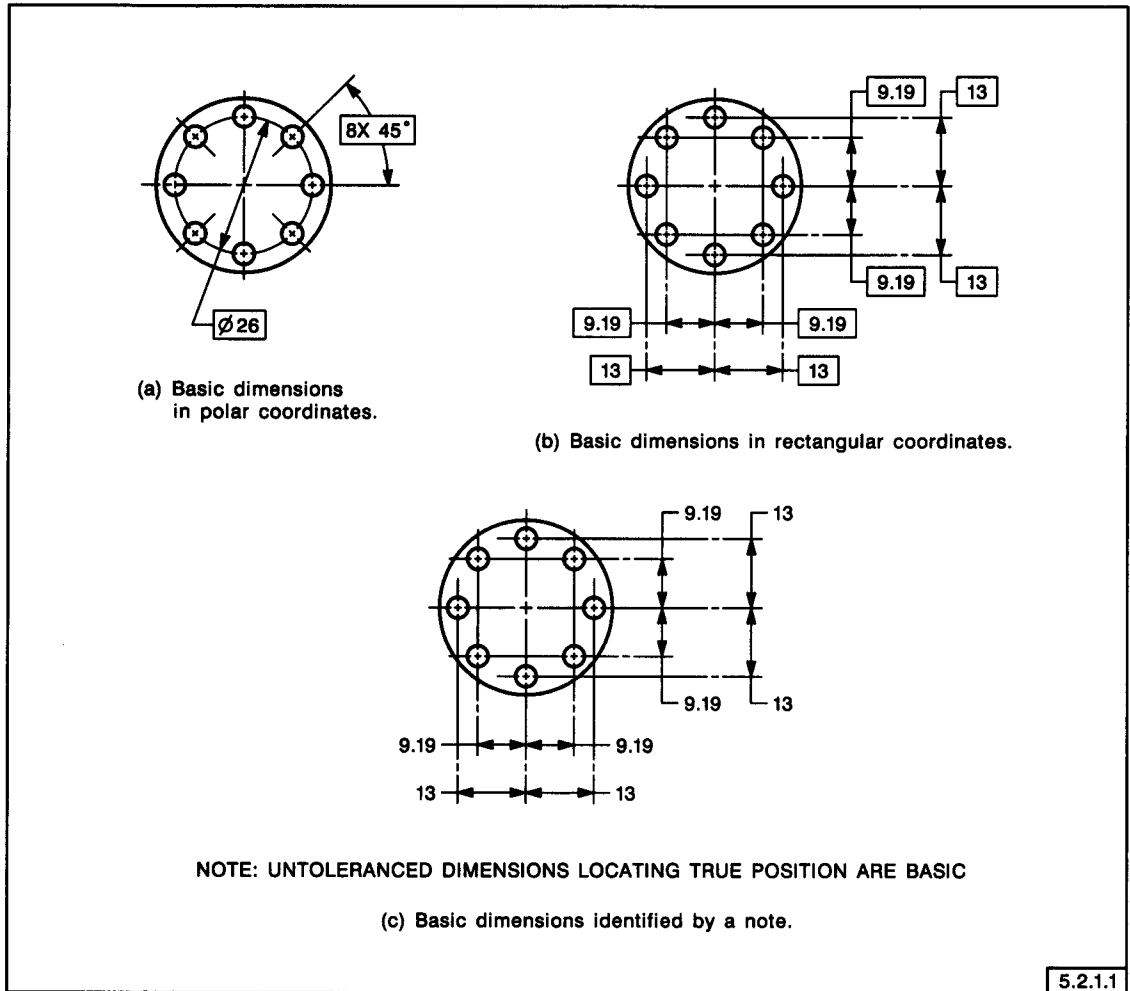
IDENTIFYING BASIC DIMENSIONS
